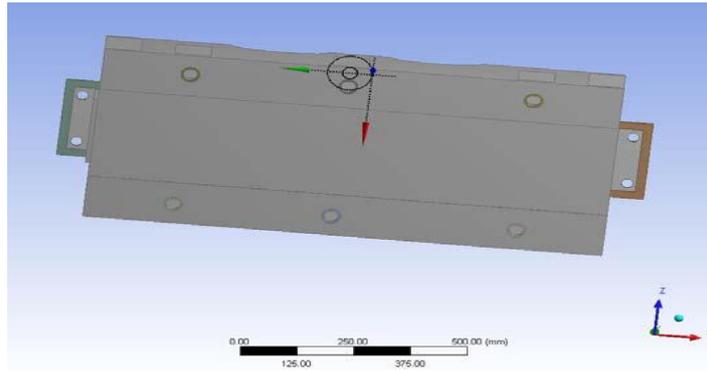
Bolt radius to support (bottom view of gearbox casing)
